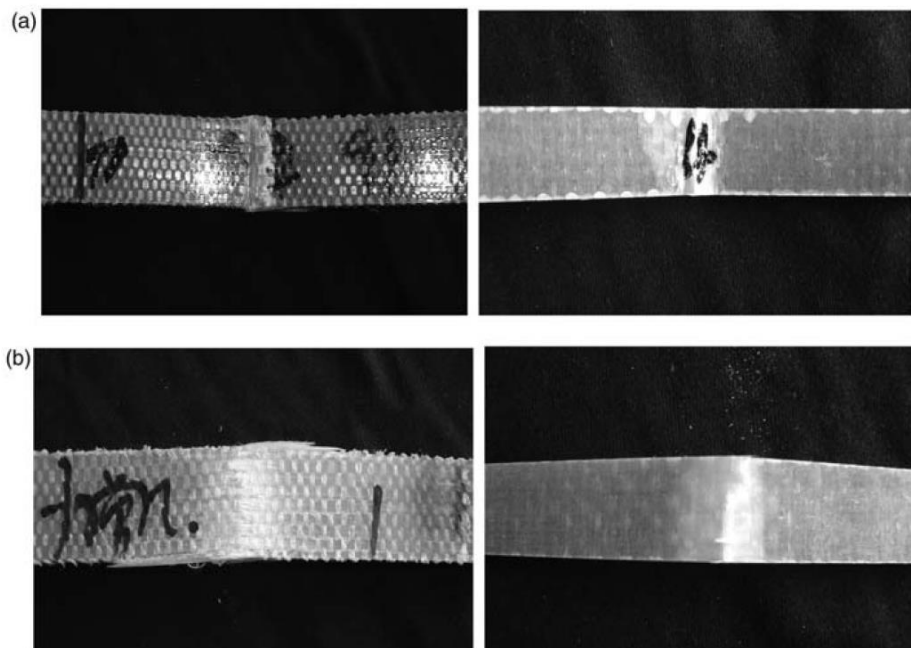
Failure mode after 3-point bending test (left: 3D composite; right: 2D composite). (a) front surface; (b) rear surface [14]
